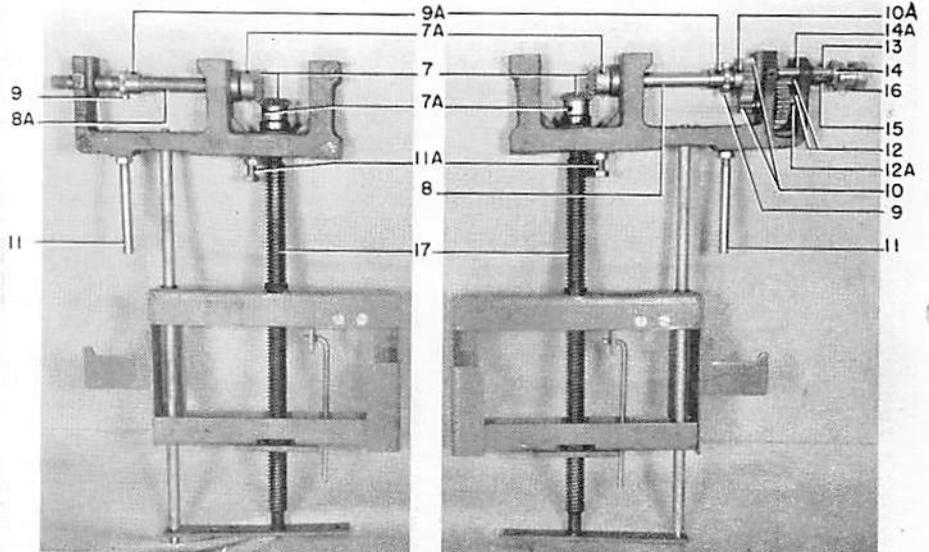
A View Showing Elevating Mechanism Motor and Control Unit
